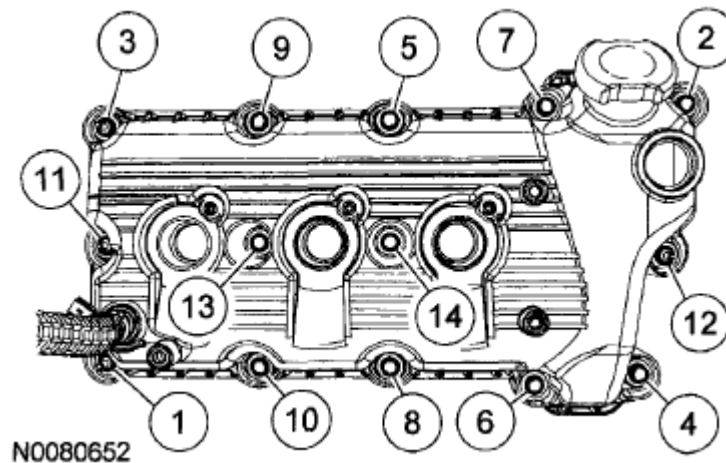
Identifying RH Valve Cover, Bolts And Stud Bolts
